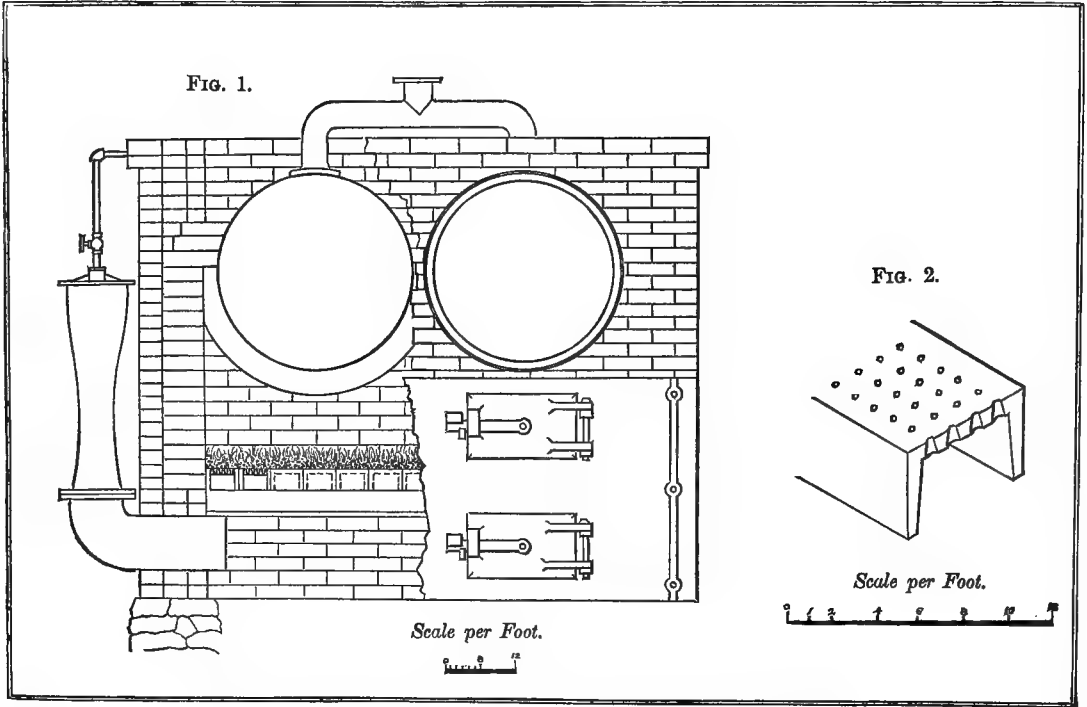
Anthracite Coal-dirt-Burner in Stationary Boiler Engine.
